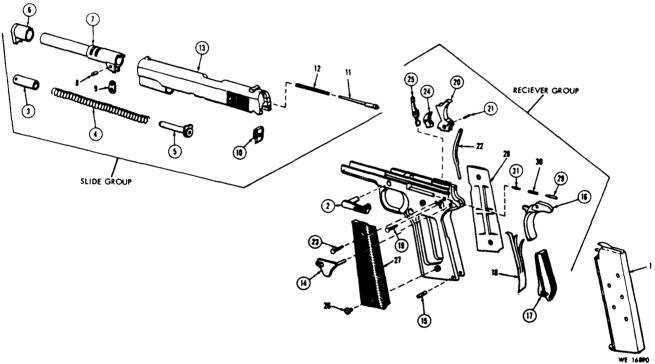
Caliber A5, Automatic, Pictol, M1911A1-partial exploded view.
